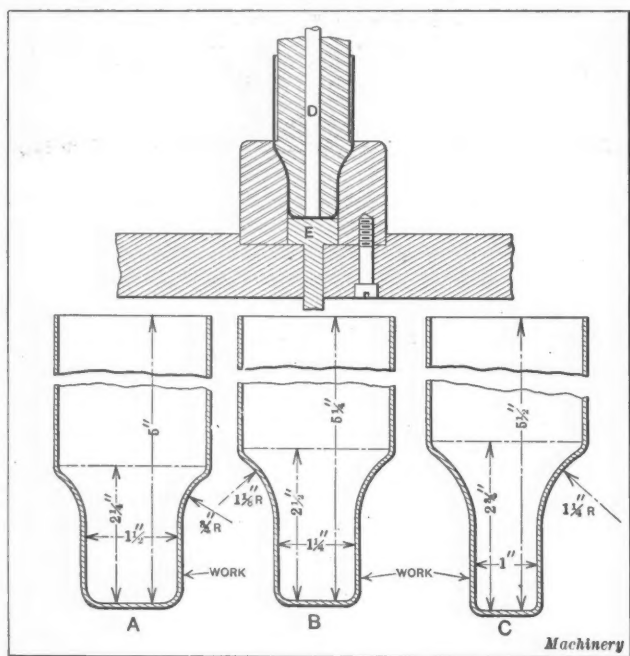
Type of Die employed to draw the Shell to the Shapes shown
